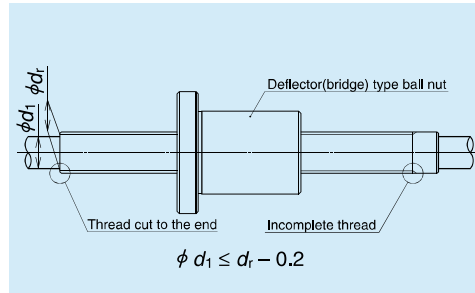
Shaft end of a deflector (bridge) recirculation system ball screw
